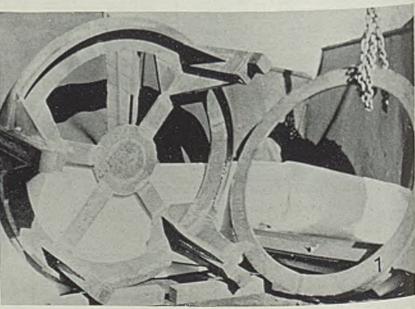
Axle drilling fixture of allwelded construction
